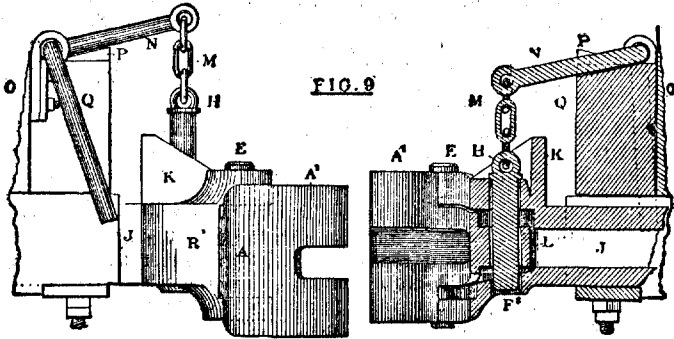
is a side view of two draw-heads, with coupling-heads attached, about to make a coupling, with the left-hand coupling-head closed up and locked, and showing vertical longitudinal section of draw-head through line X<sup>o</sup>, Y<sup>o</sup>, of Fig. 10.
